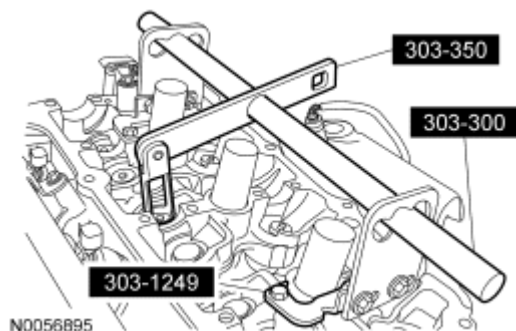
Removing Keys, Retainer & Spring Using Special Tools (303-1249, 303-350, 303-300)
